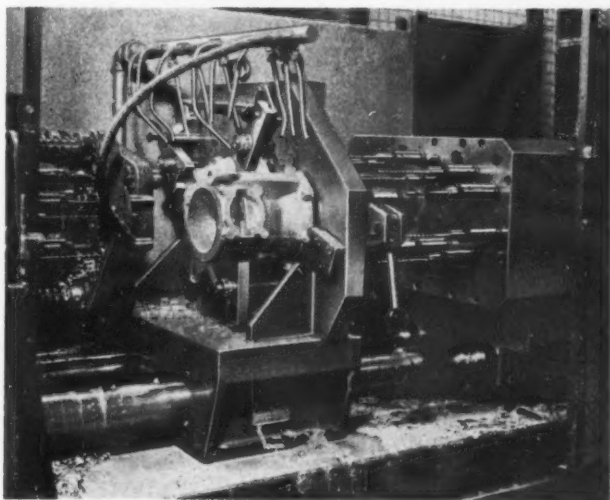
Set-up for Drilling Holes in Both Faces of One Portion of the Transmission Casing on a Grob Machine
